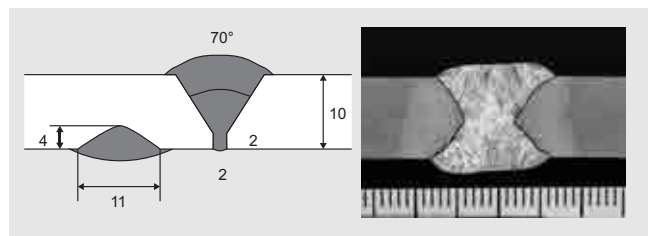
Groove configuration and macro-structure of DW-N709SP weld metal
